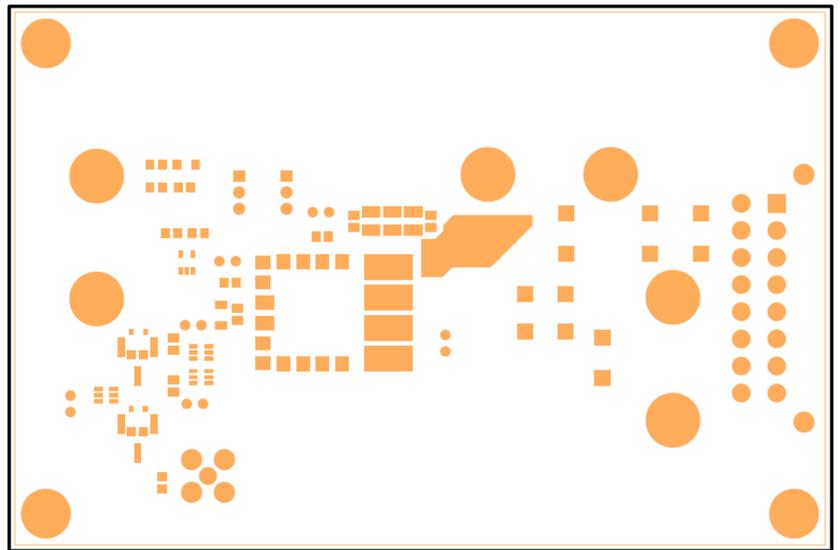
EPC7C005/FBS-GAM02 POL Evaluation Board Top Solder Mask
